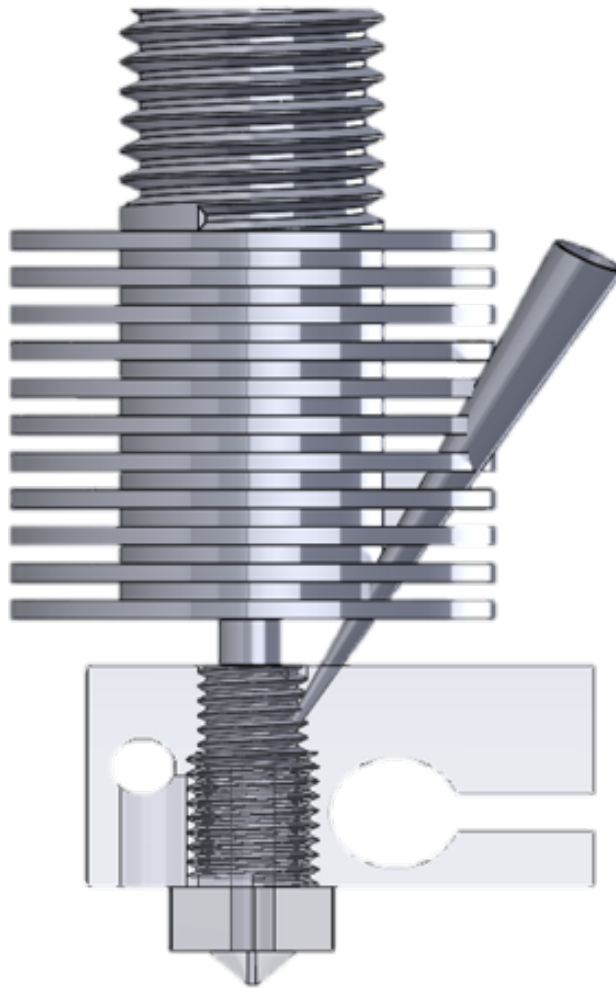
CAD assembly of modified E3D extruder assembly with a continuous fiber injector for coaxial extrusion used for planning needle placement before machining existing assembly
